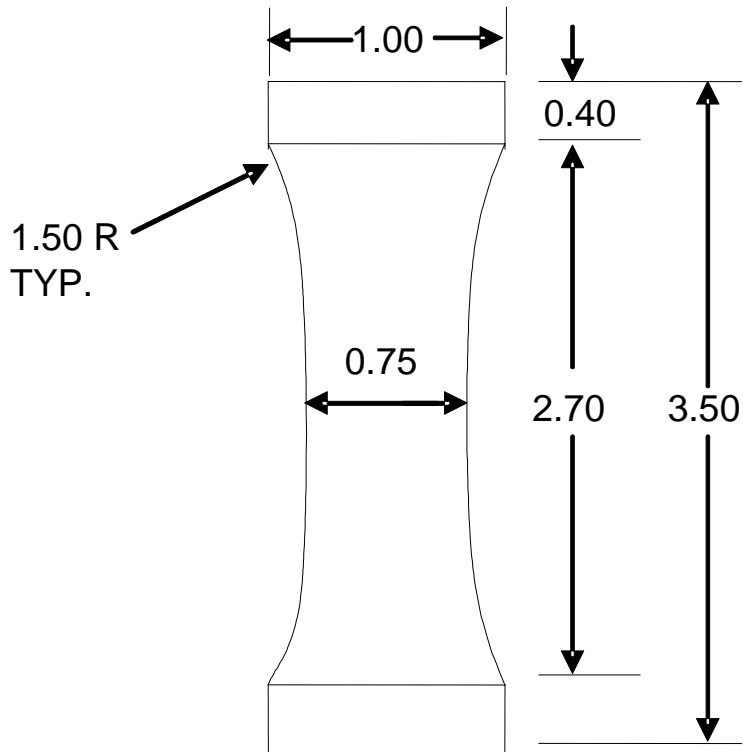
Schematic of compression test specimen (All dimensions are in inches.)
